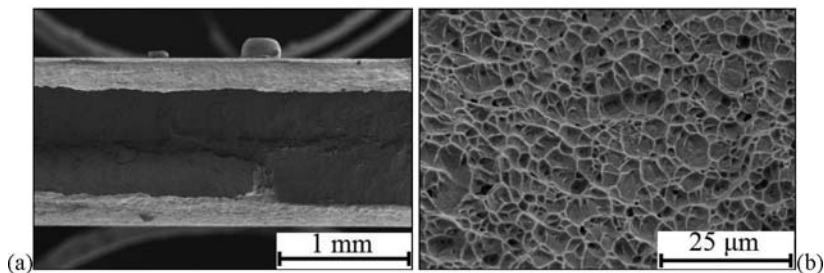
Fracture surfaces of the butt joint TWIP/TWIP in the weld seam: (a) macroscopic and (b) microscopic views.
